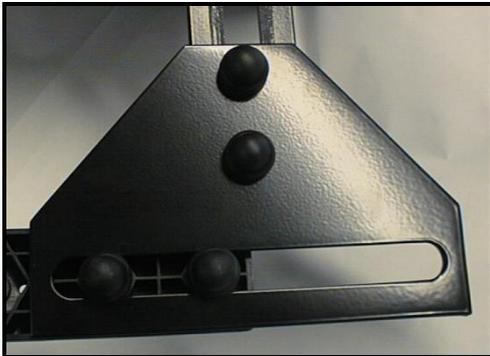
Helios side mount & AGD Bracket Assembly (667/1/30200/058)
